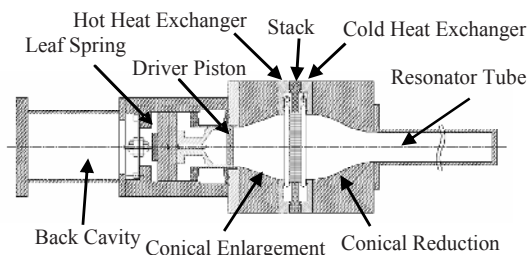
Schematic of the standing wave thermoacoustic cooler. Dimensions of the parts are listed in Table 1.
